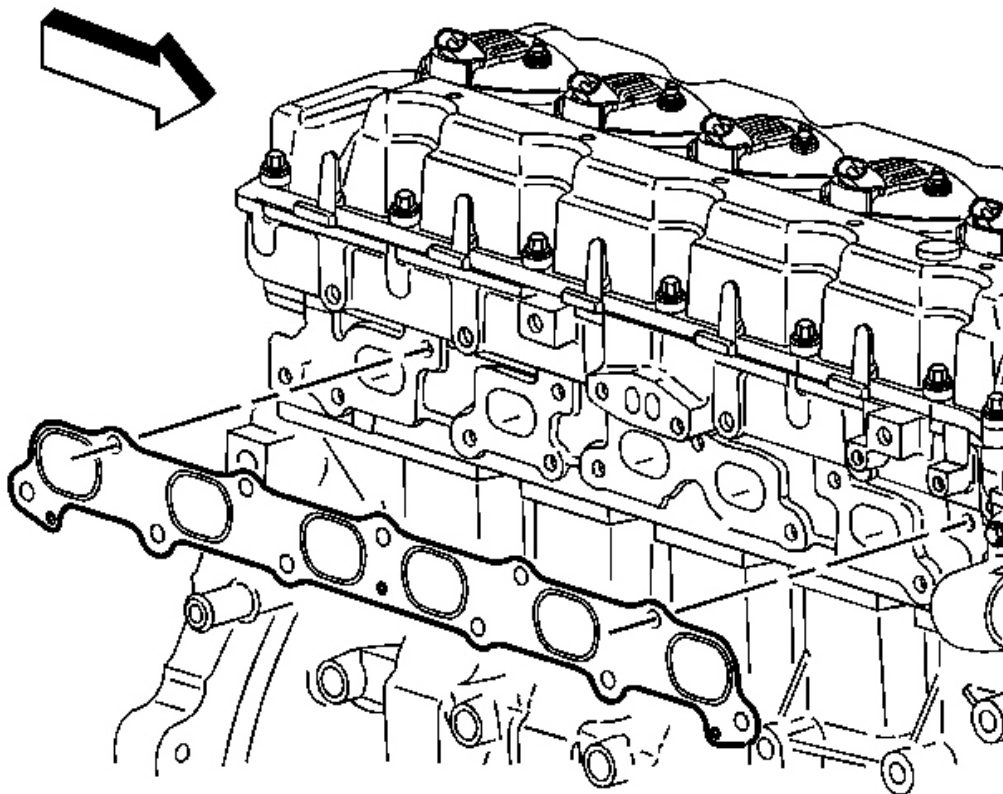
View Of Exhaust Manifold Gasket - 4.2L
